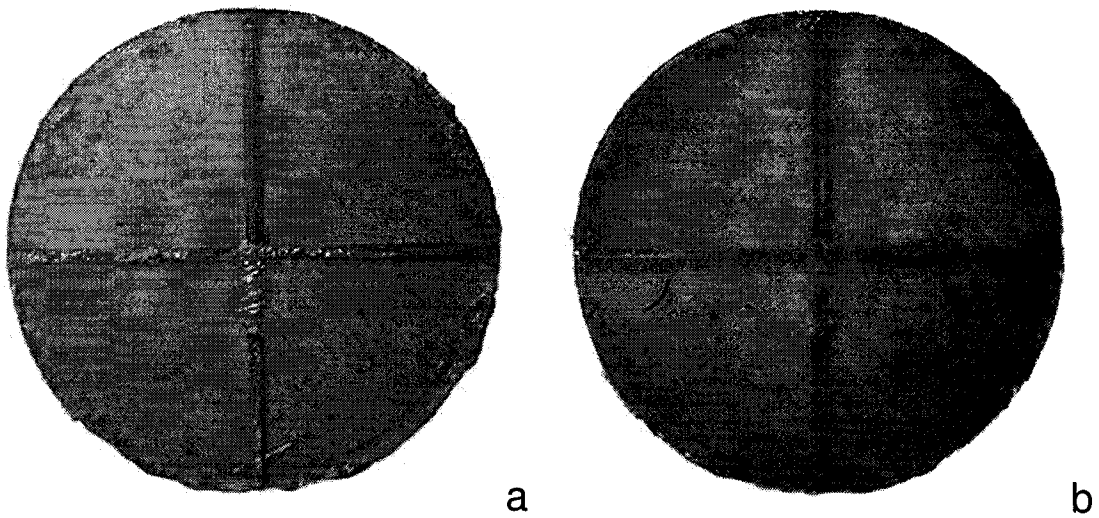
Photograph of disk 2K4R-HG molded with 4 layers of preform and 2 flow channels. Mold cavity surrounding preform filled with a ring of hot glue prior to filling.. a: top; b: bottom
